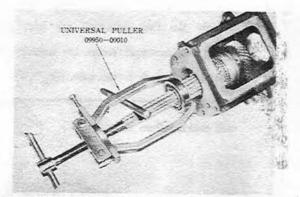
Removing the transmission rear bearing form the spline shaft with universal puller.
